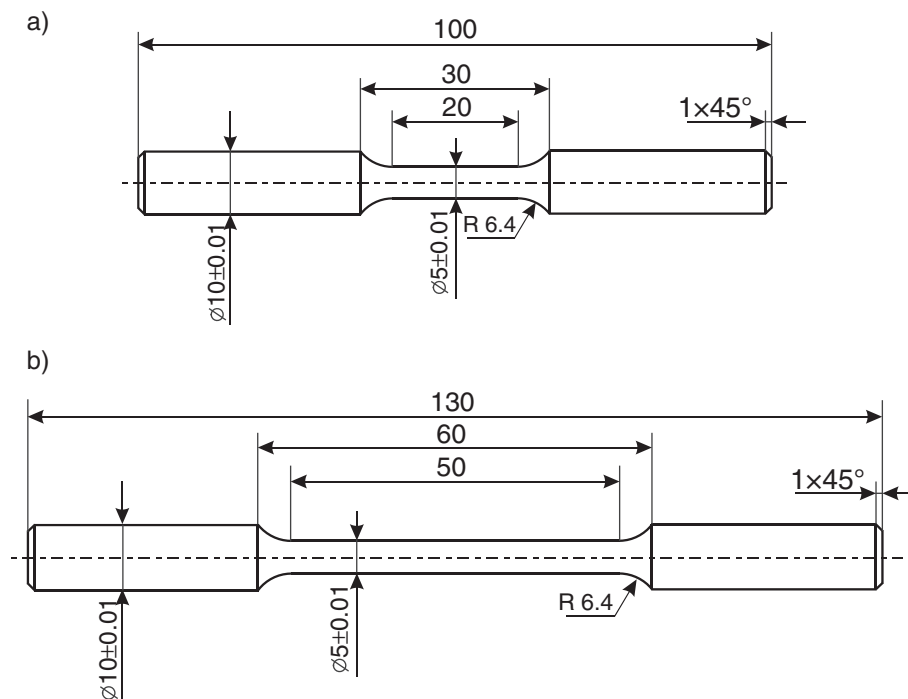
Specimens for fatigue and corrosion-fatigue tests
